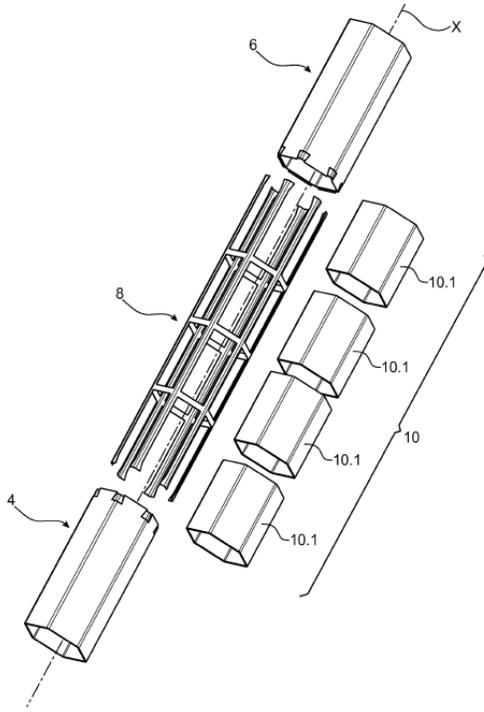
Hexagonal tube composite assembly body for SFR (Ref. 2)
